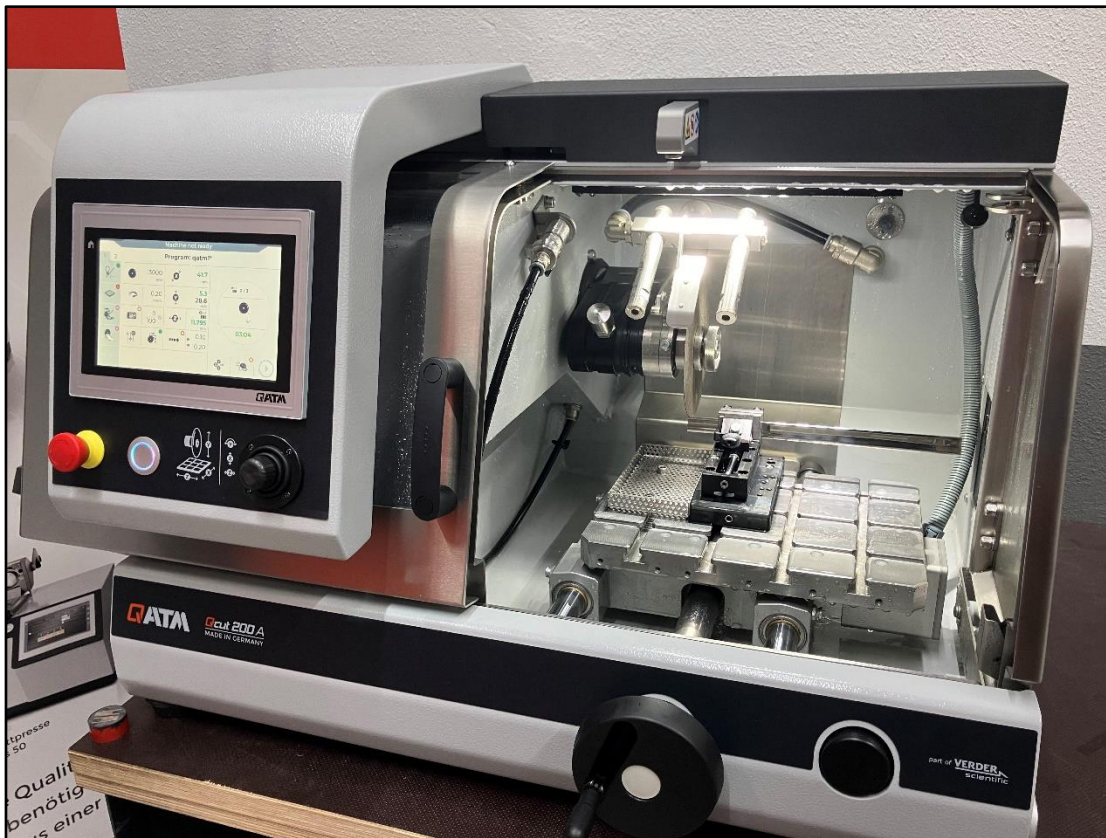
Overview of the cutting machine Qcut 200 A and recommended clamping tool.
